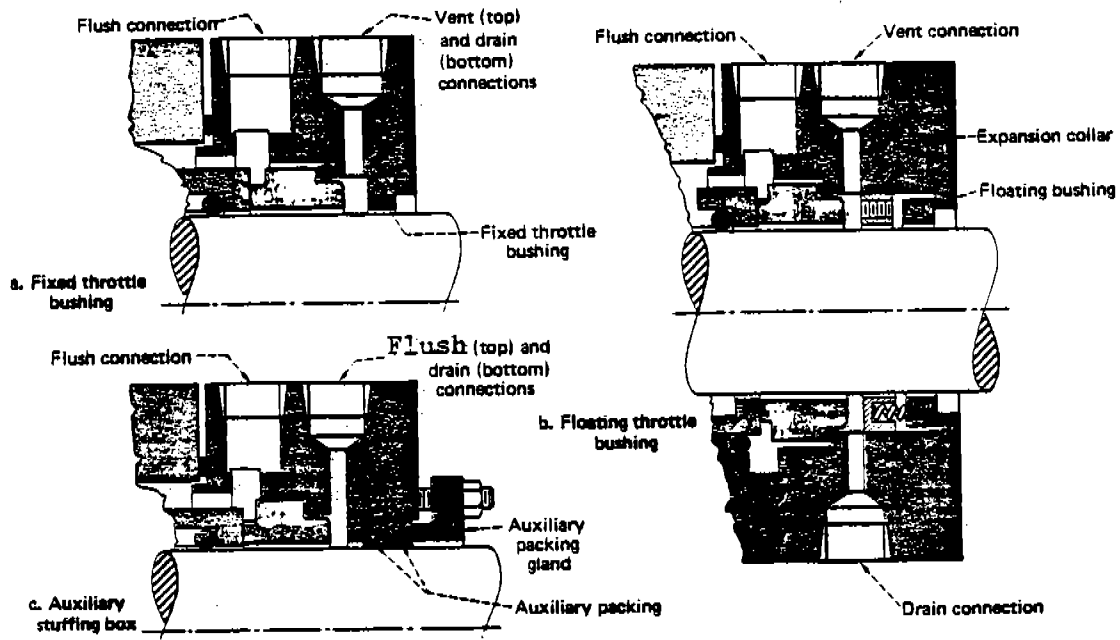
Back-up Systems for Seal Failure.
